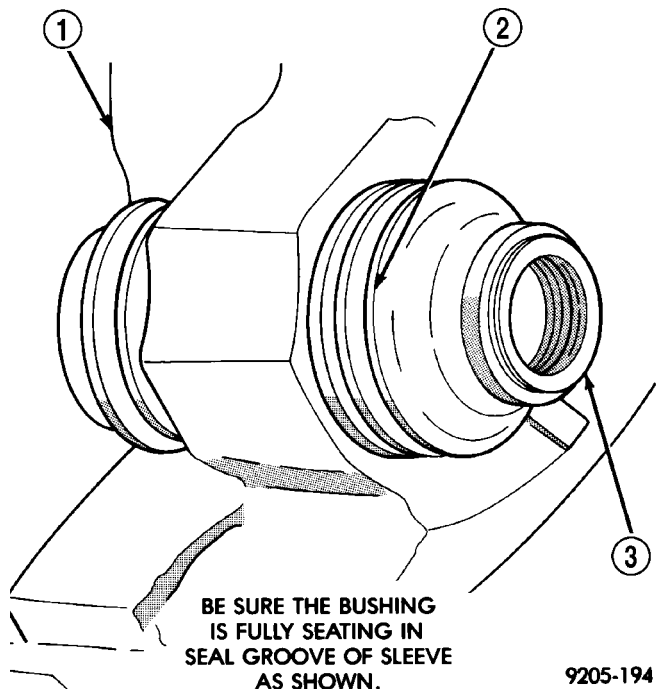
Correctly Installed Guide Pin Sleeve And Bushing
